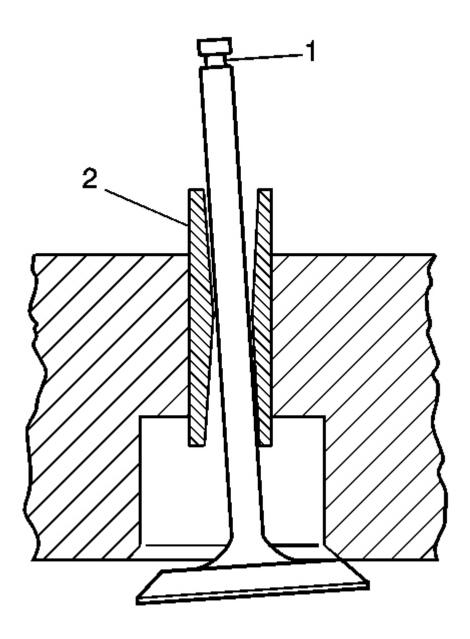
Inspecting For Excessive Valve Stem To Guide Clearance Courtesy of GENERAL MOTORS CORP.
